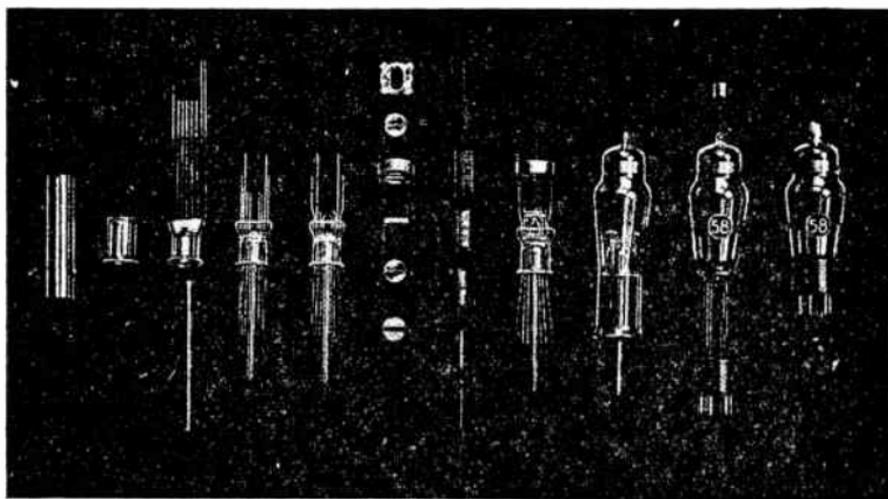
Parts and assembly of a typical glass radio tube. The filament, grid screen and plate are sealed in the tube, from which the air has been removed. (Courtesy R.C.A. Mfg. Co.)
